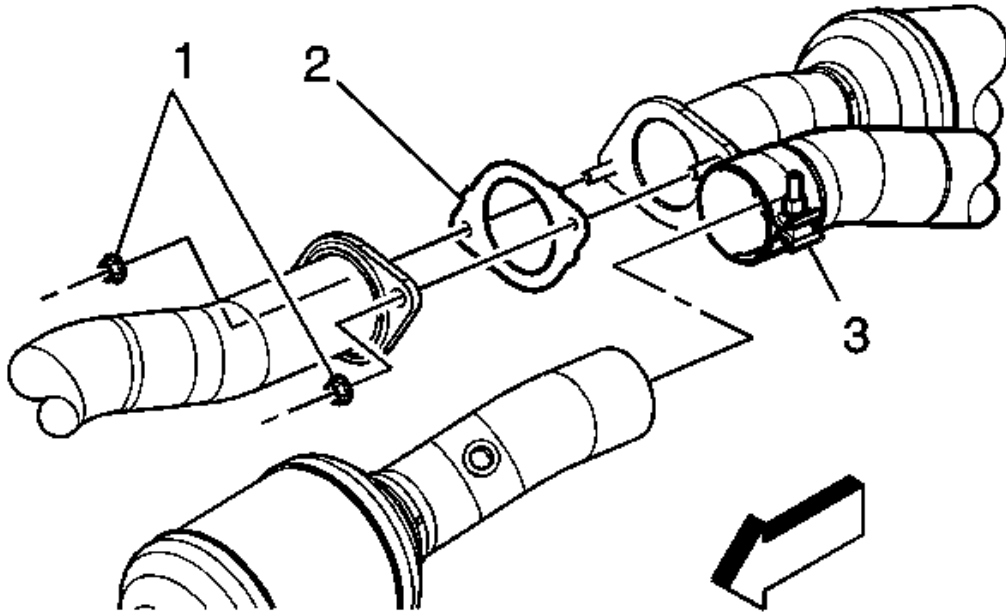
View Of Exhaust Muffler, Exhaust Manifold Pipe, Gasket & Nuts
